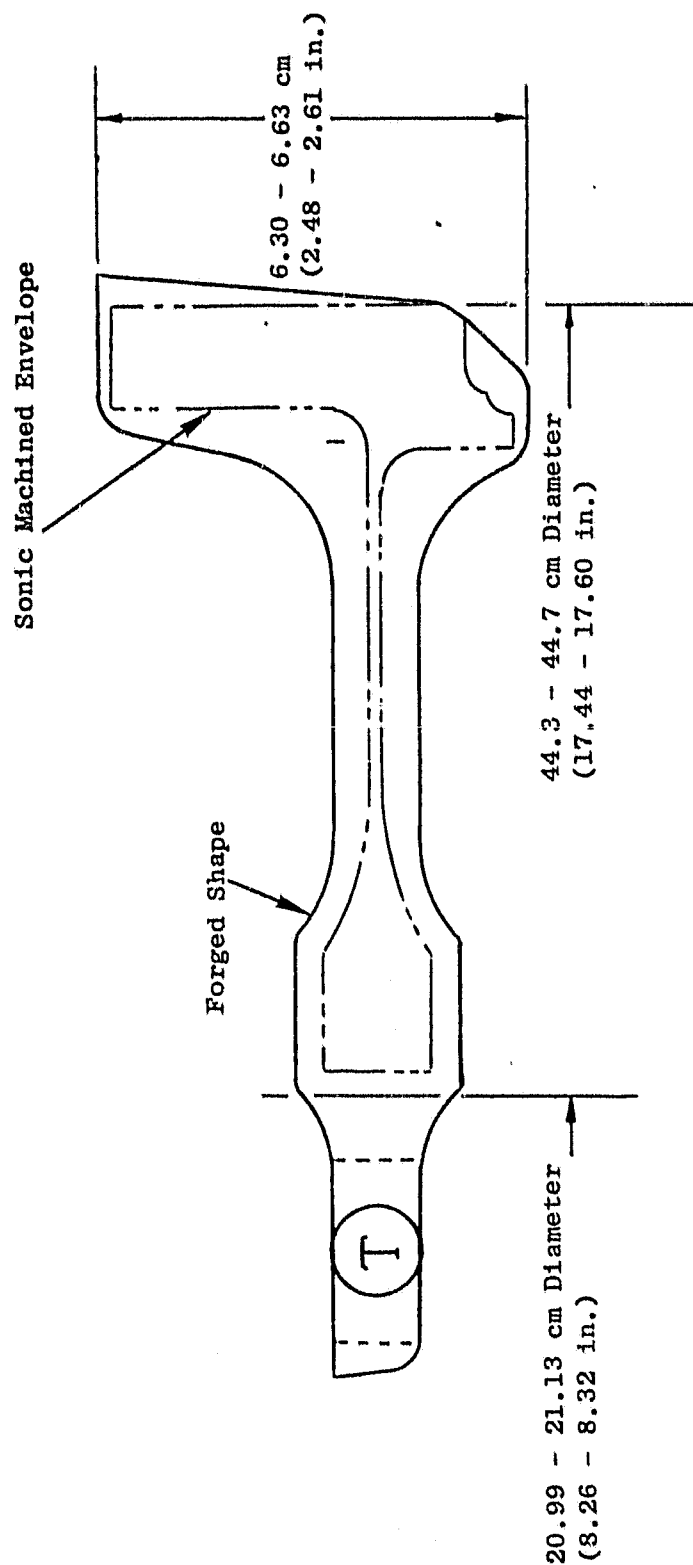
CFM56 Stage 5 through 9 Compressor Rotor Disk Forging Configuration.
